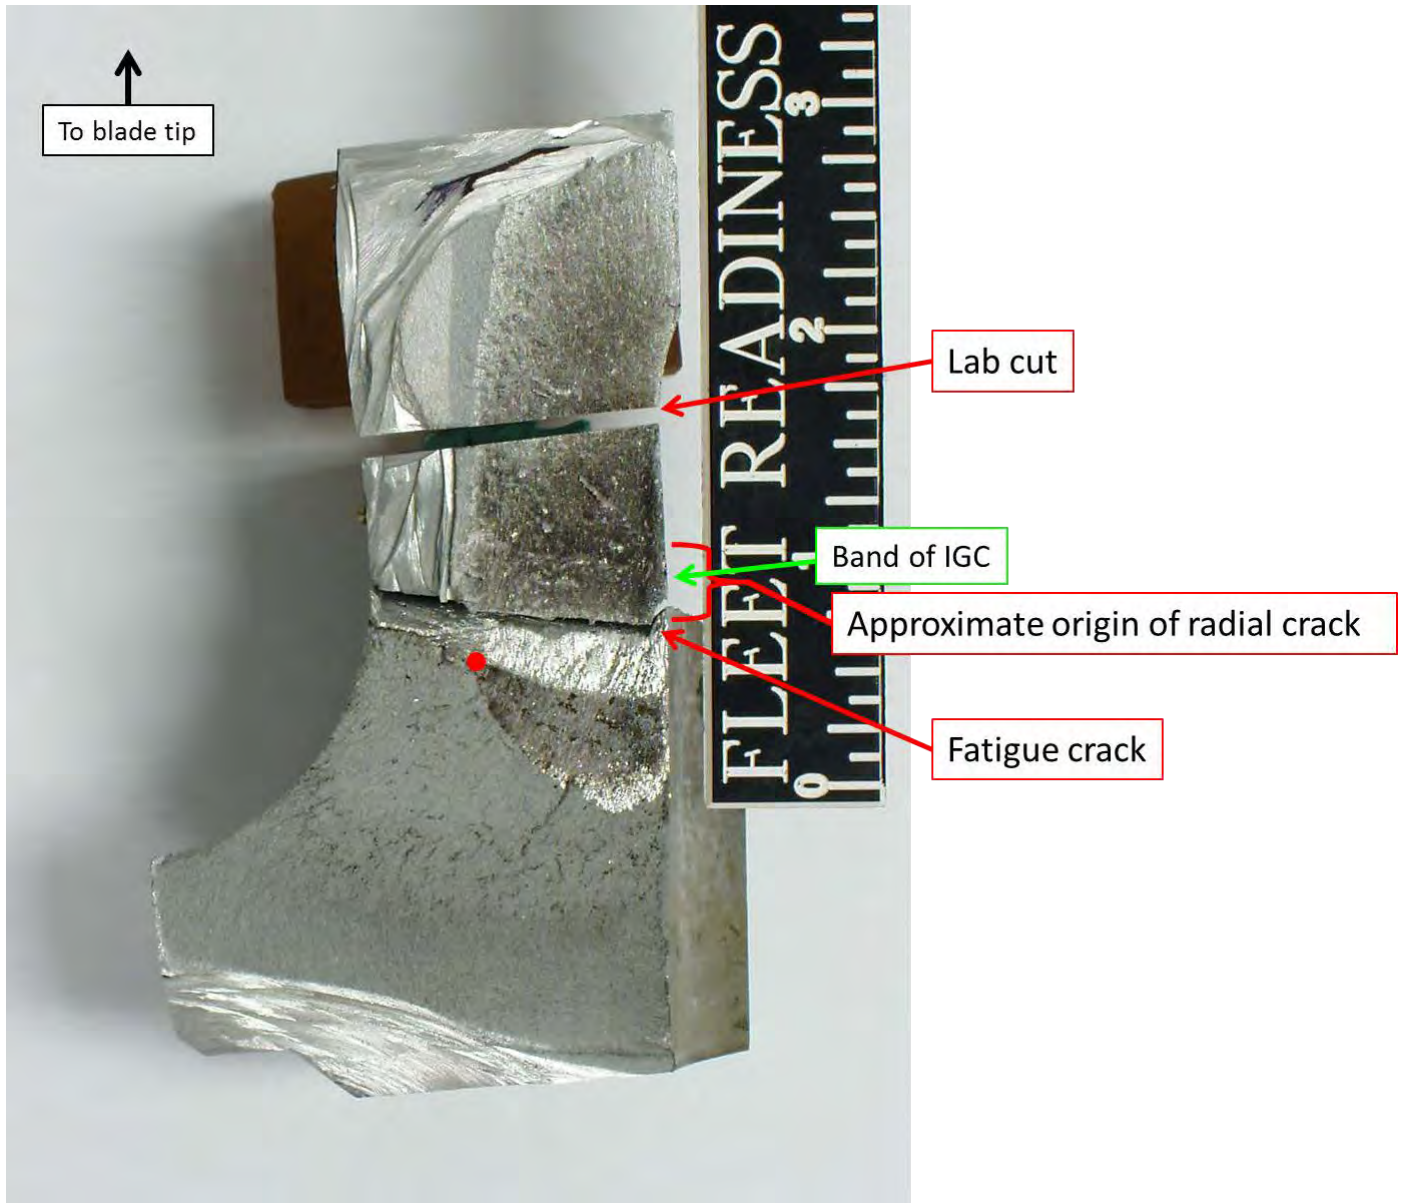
Intergranular radial crack fracture surface. Red dot indicates fatigue origin. Blade shank ID (taper and bushing bore surfaces) is on right.
